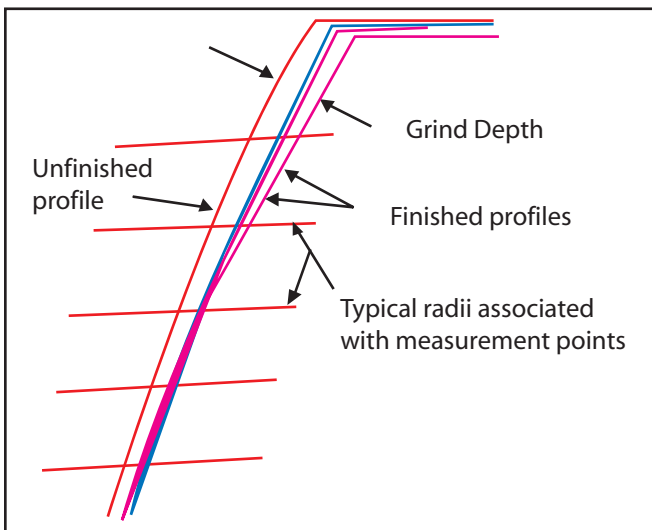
Grind depth is the difference between the unfinished and finished tooth surfaces measured normal to the finished gear tooth surface.
